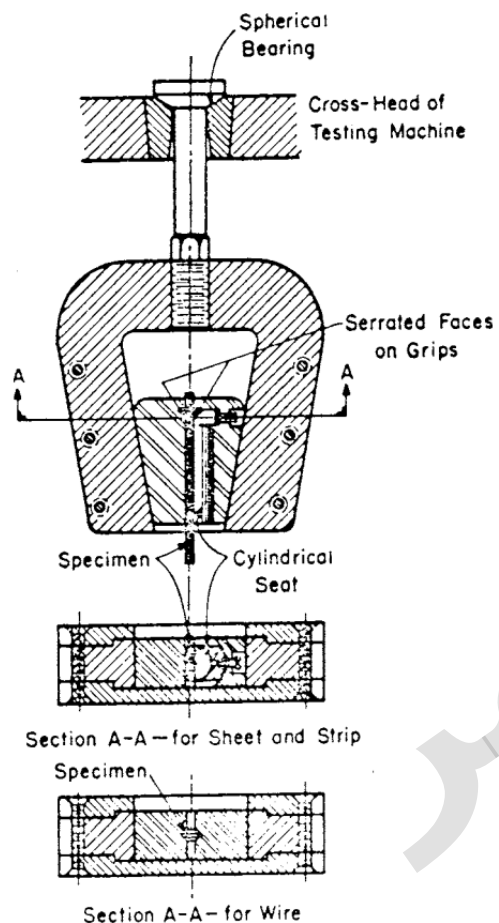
Gripping Devices for Sheet and Wire Specimens
